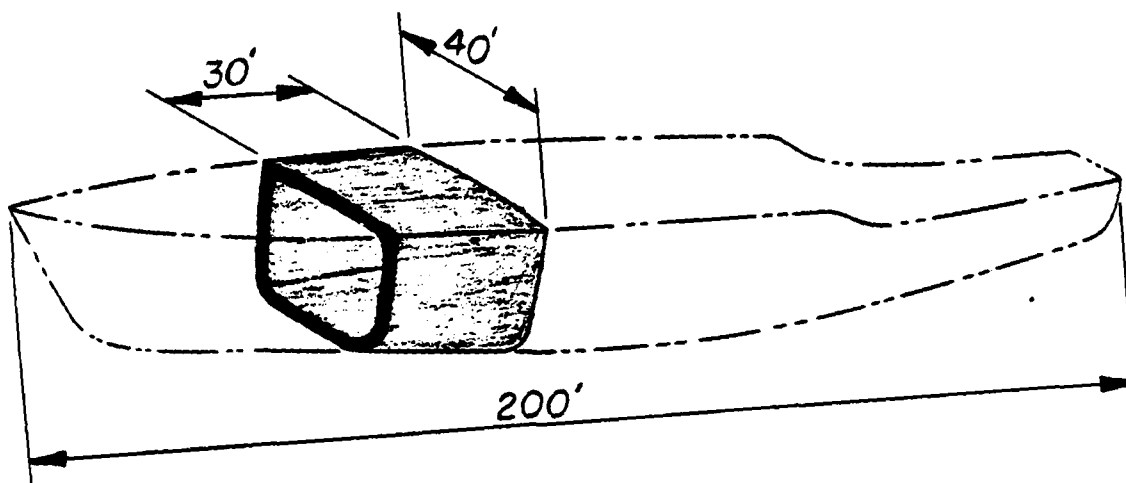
B. Section of Full Size Hull Proposed to be Filament Wound
